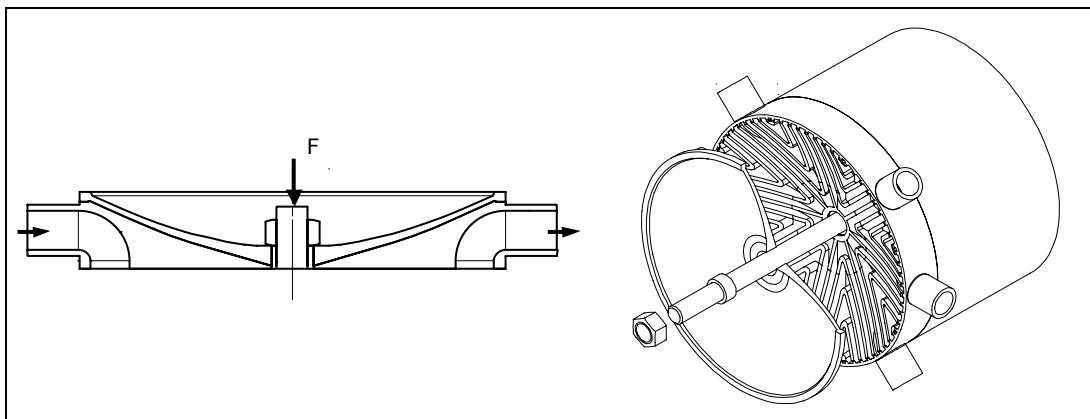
end plate for axisymmetric fuel cell stack based on Dbow-concept, head plate, schematic view
